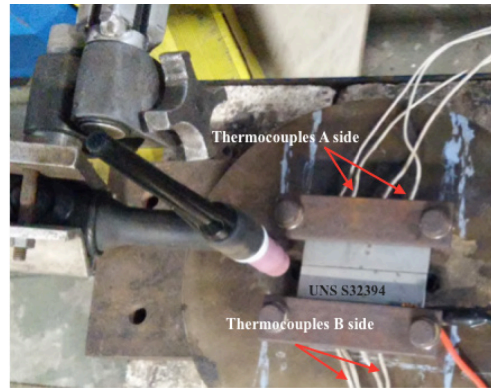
Welding arrangement for the duplex stainless steel UNS S32304 thin plates.
